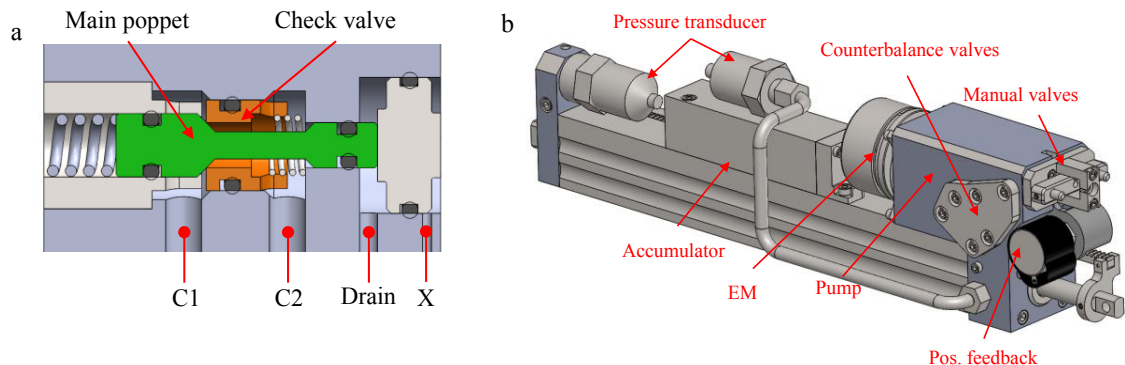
Counterbalance section view (a), 3D view of the EHA (b)
